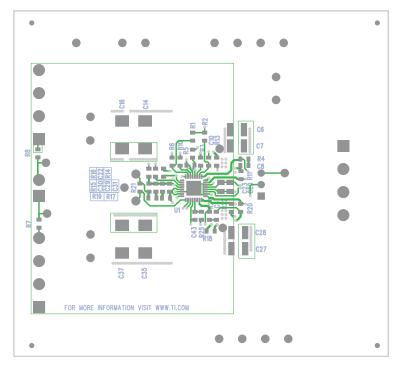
TPS40322EVM-074 Bottom Silk (bottom view)
